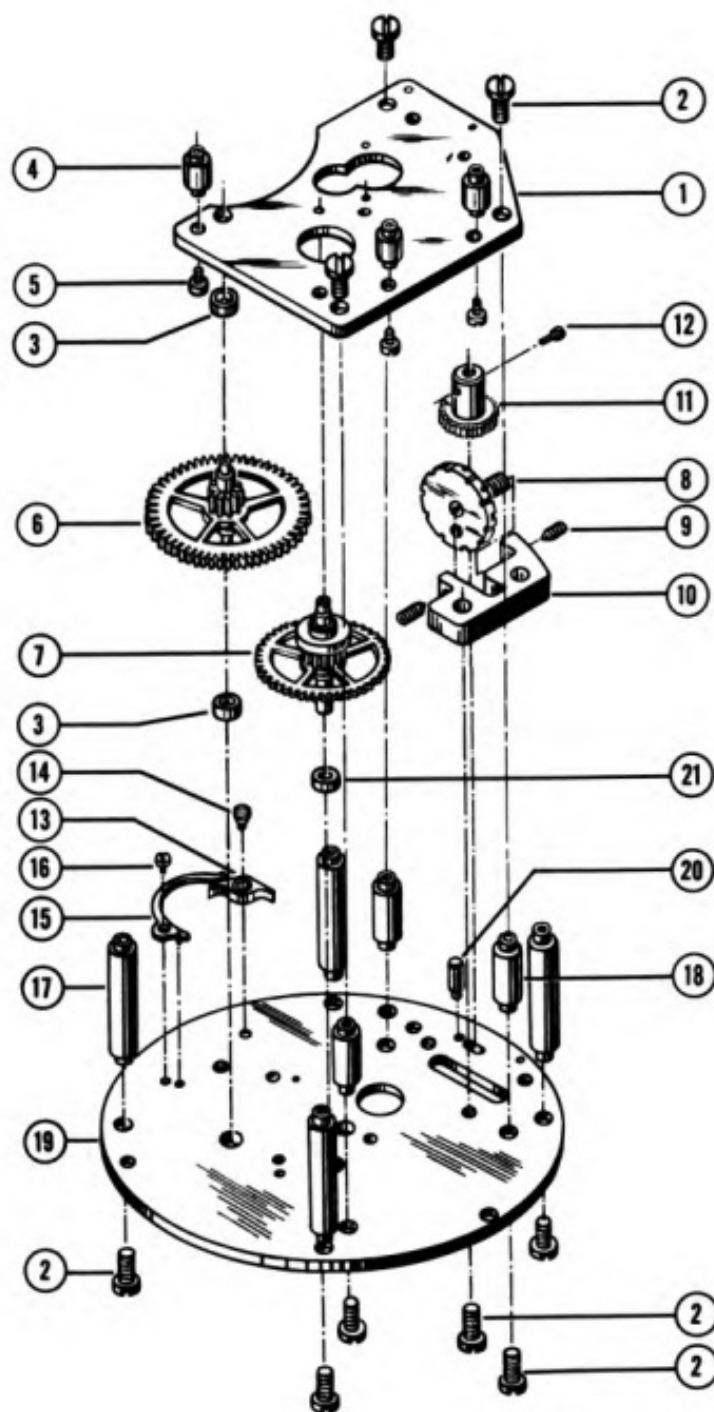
Chelsea No. 12E Mechanical Clock Components—Exploded View
